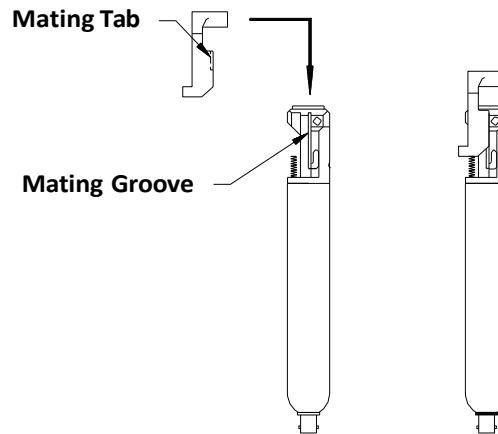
, Installation of Ground Jaw onto RF Jaw/Tube Assembly
